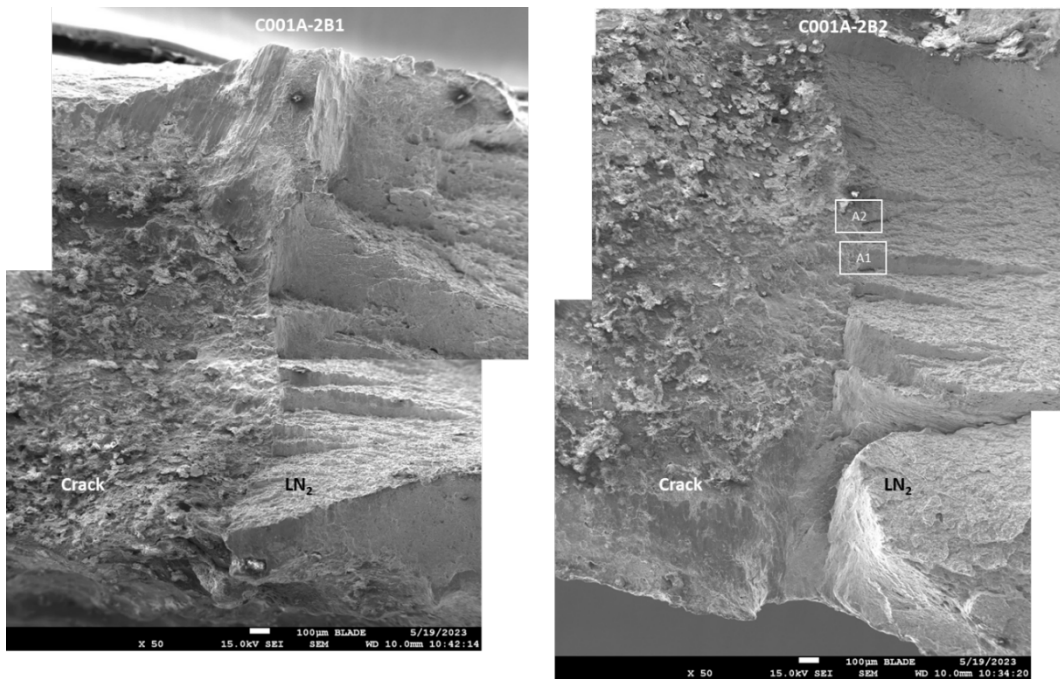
C001A-2B1 and C001A-2B2 Fracture Surfaces
